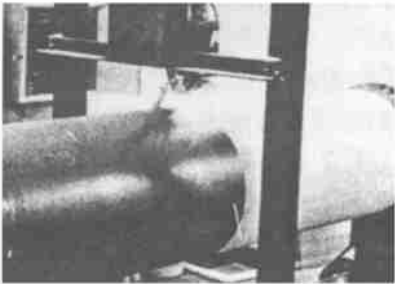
Laser surface hardening for mould cutting roller of 50 carbon steel
